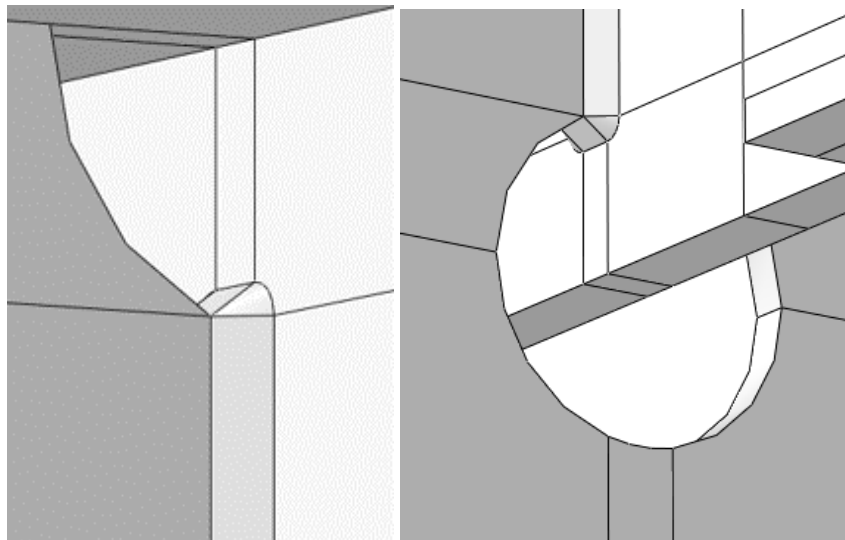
Modelling of fillet weld geometry in solid element model
